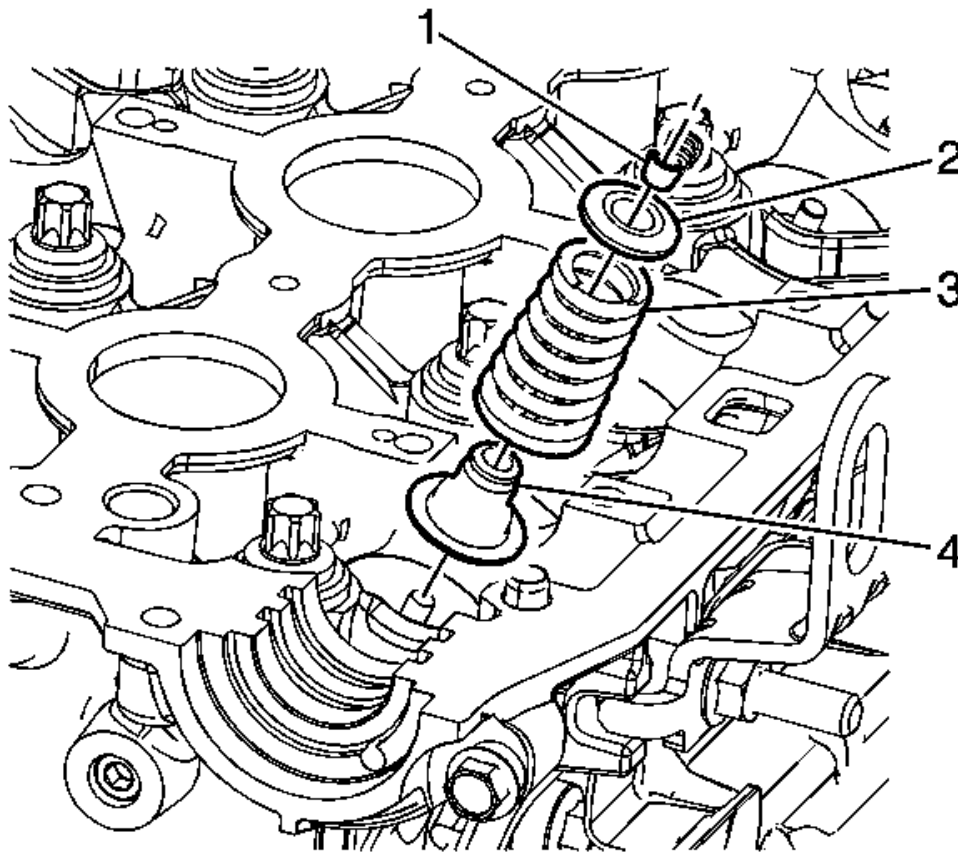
Valve Key, Valve Spring, Retainer, And Seal
